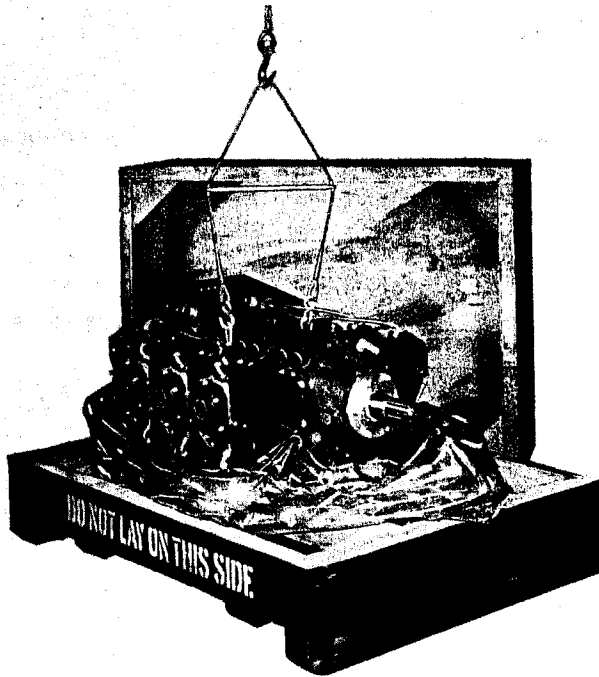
Removing Engine from Shipping Box with Lifting Sling and Hoist
